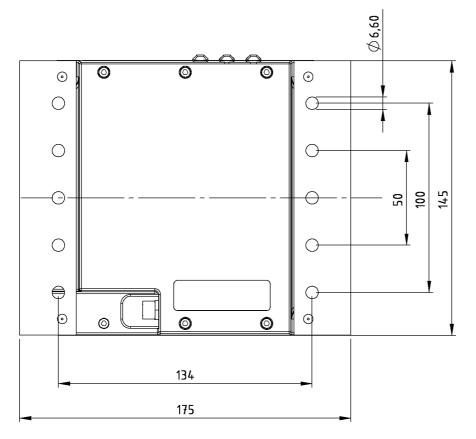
Mounting UDL120 with steel sides (Protection Set 1)
